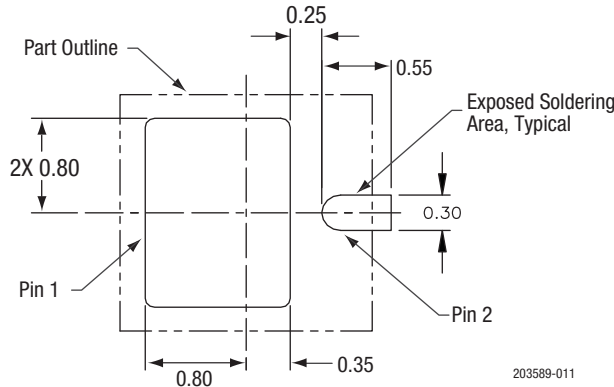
SMP1331-087LF PCB Layout Footprint (Top View)
